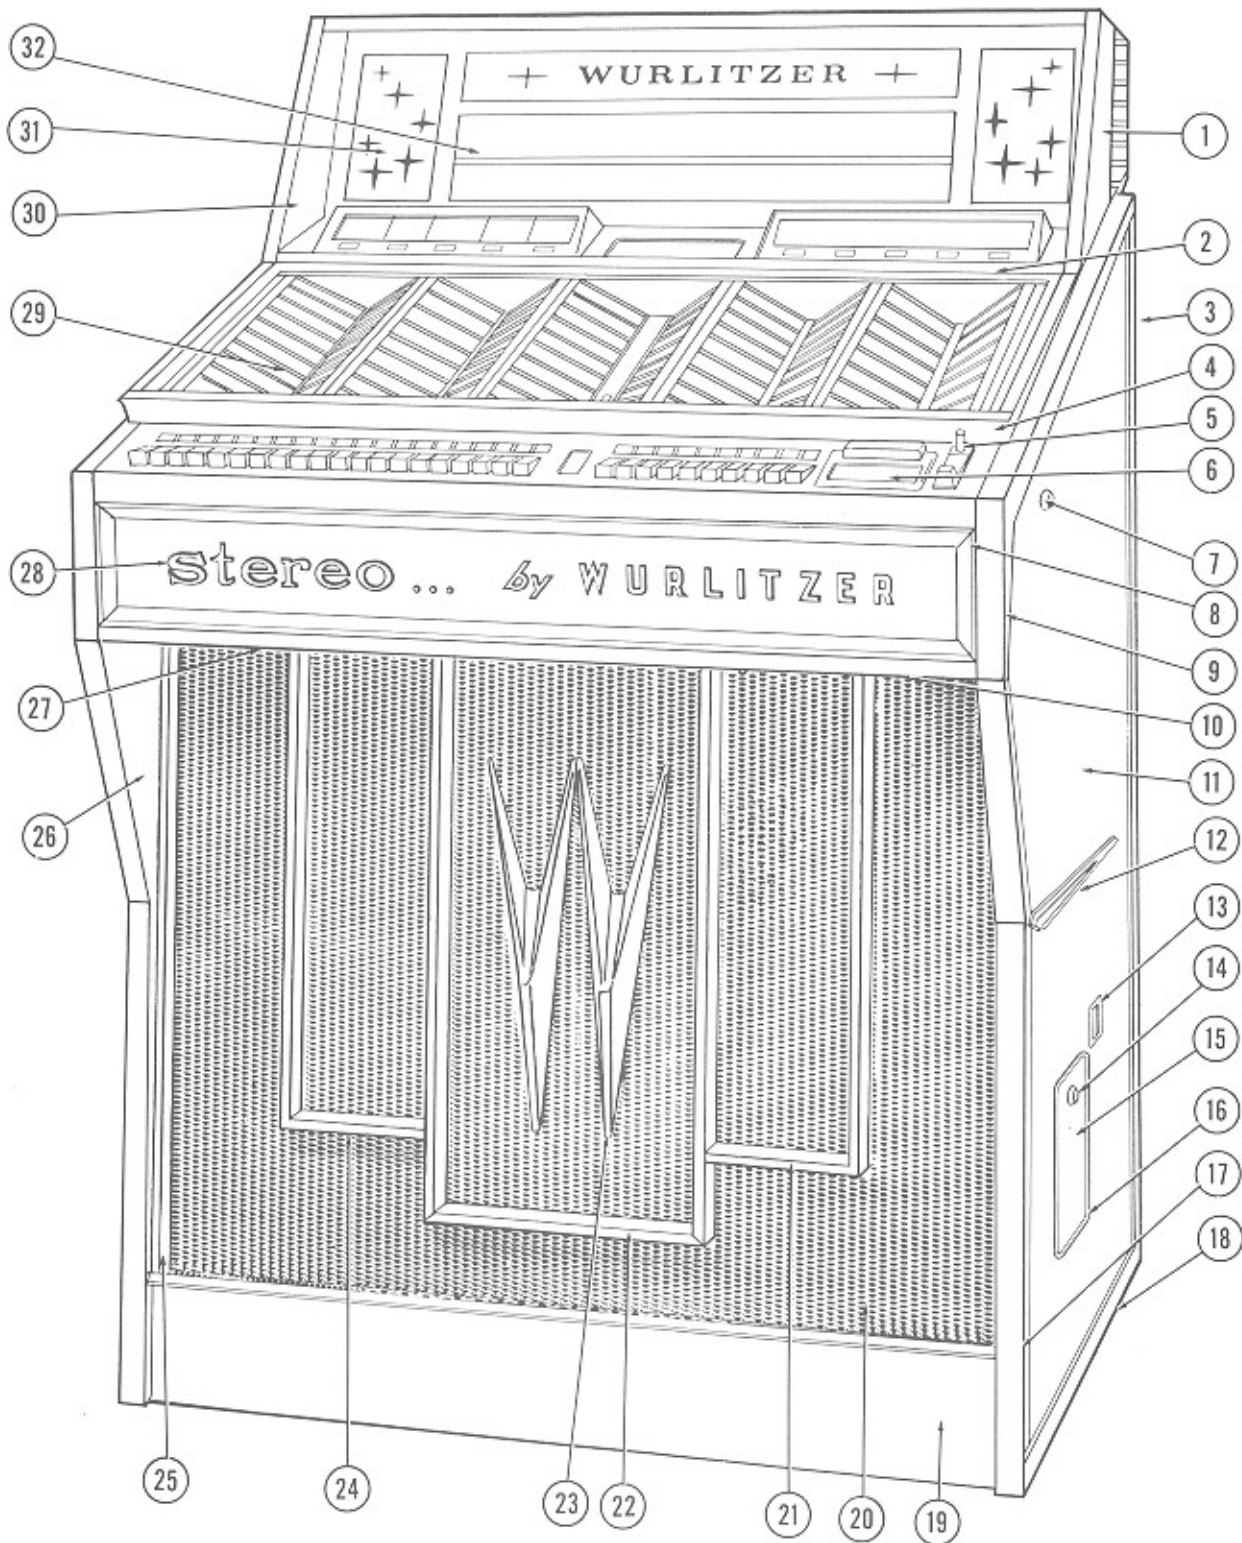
TRIM AND MOUNTING - FRONT VIEW - 2800
